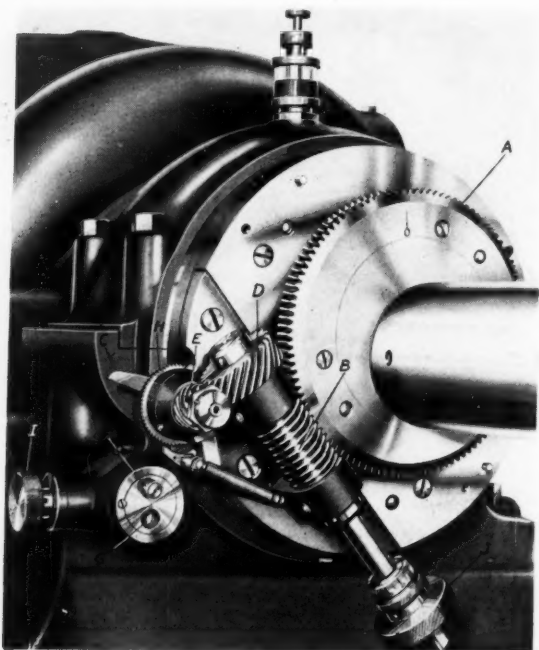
Operating mechanism of planetary headstock. Control mechanism for regulating eccentricity is adjusted by knob *J
